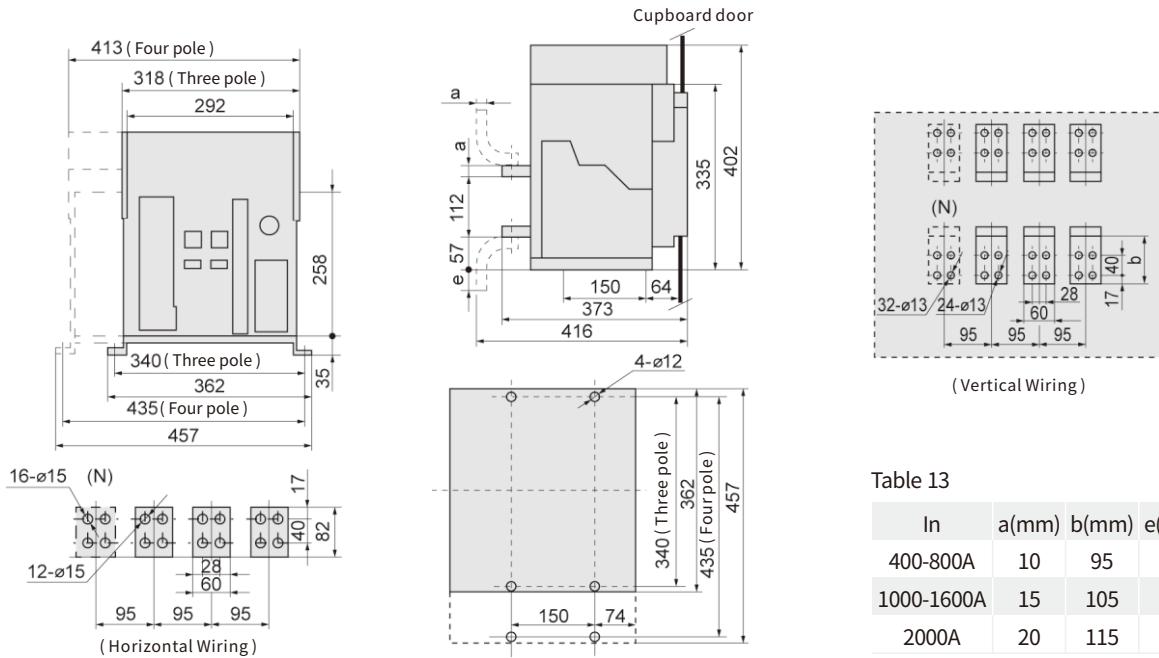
Outline and installation dimensions of fixed type circuit breaker (EKA1-2000, 2000/4)
